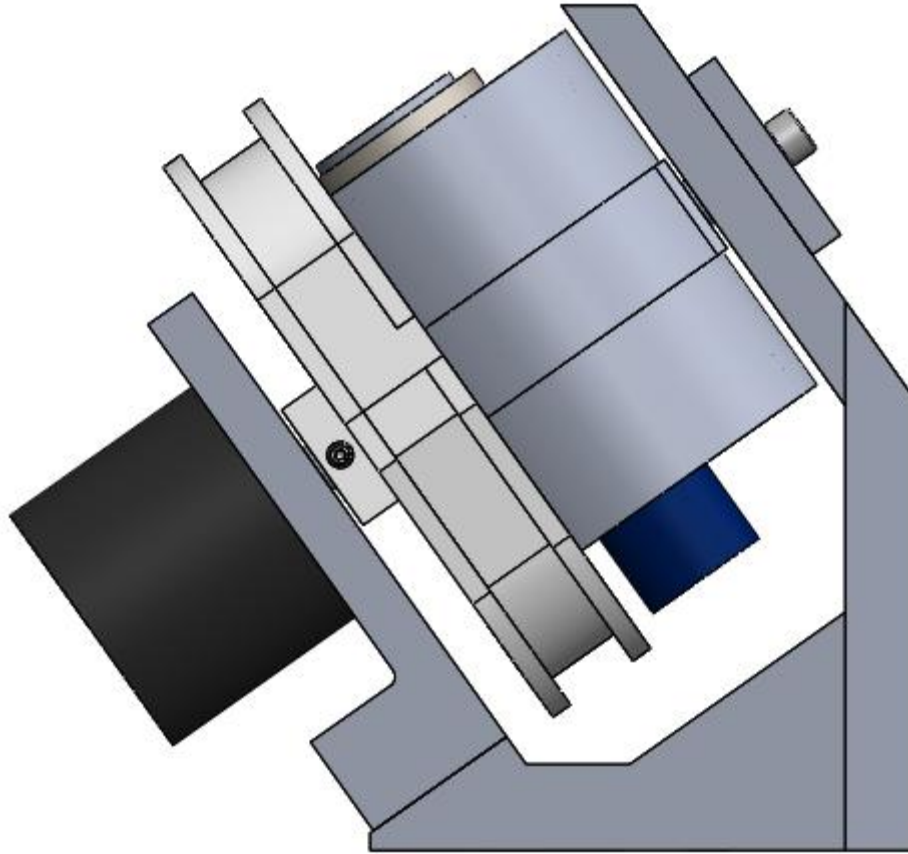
The gimbal assembly for a single CMG consists of the gimbal motor, the gimbal support structure, the gimbal spool, and the spin assembly.
